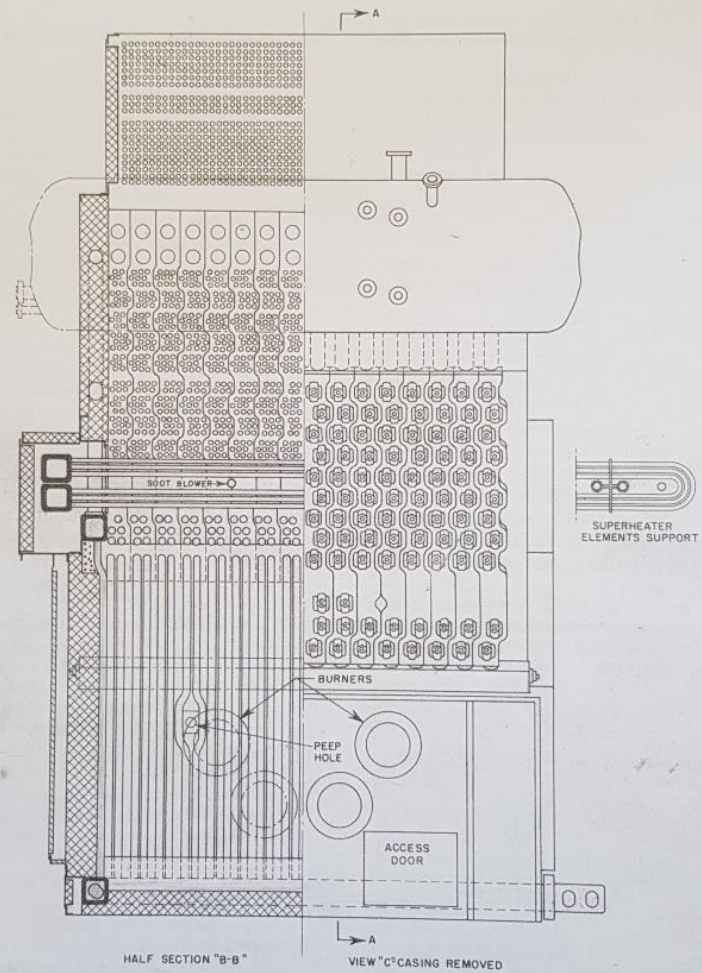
HALF TRANSVERSE SECTION THROUGH BOILER, SUPERHEATER, AIR HEATER AND FURNACE AT LEFT. HALF FRONT ELEVATION IS SHOWN AT RIGHT.
